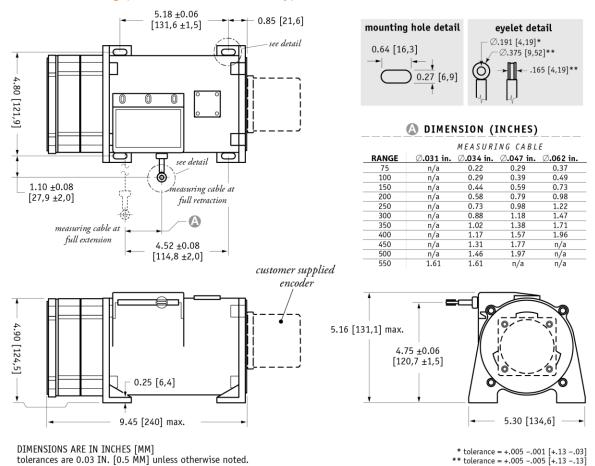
Outline Drawing (36 oz. cable tension only)
